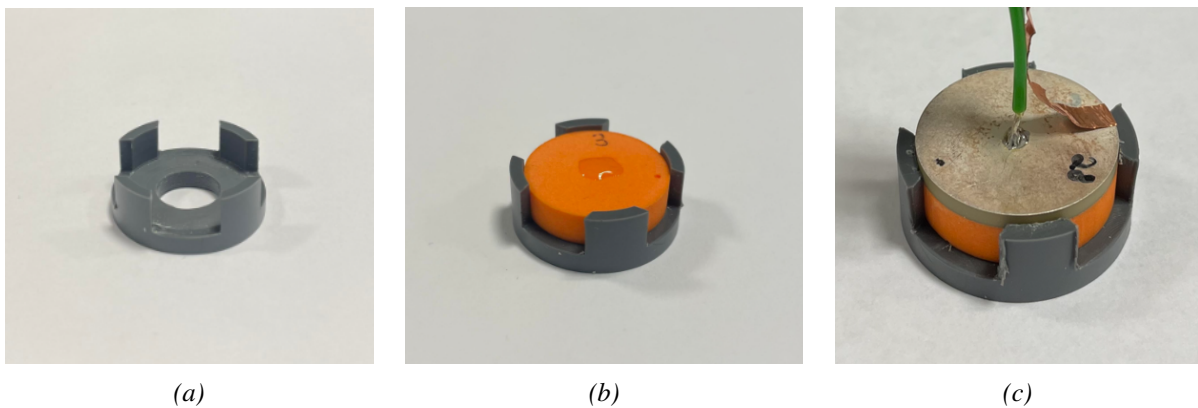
(a) Alignment holder (b) Matching layer and alignment holder with glue applied to the matching layer. (c) Matching layer and piezoelectric disk glued together.
